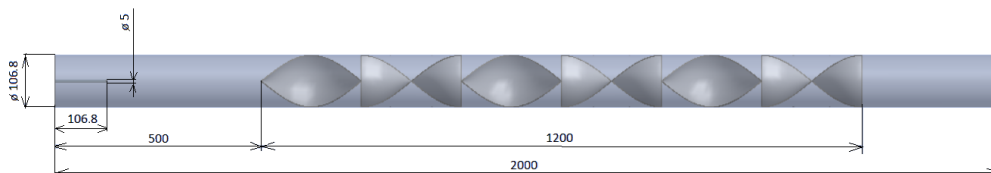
Pipe dimensions TR114x3.6 with helical mixer.
